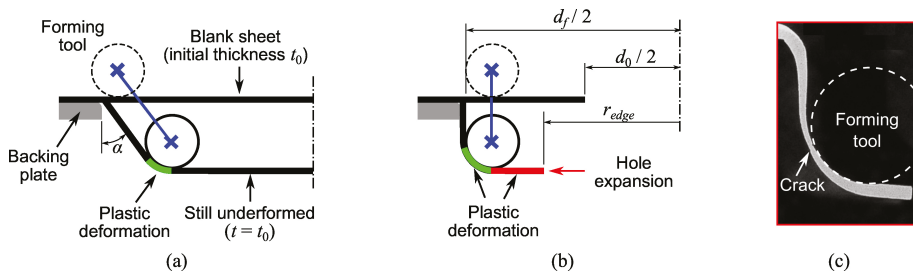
Schema of axisymmetric part deformation by SPIF of (a) inclined-wall part and (b) hole-flanged part; and (c) fractography of the failure zone for an interrupted hole-flanging test [11].
